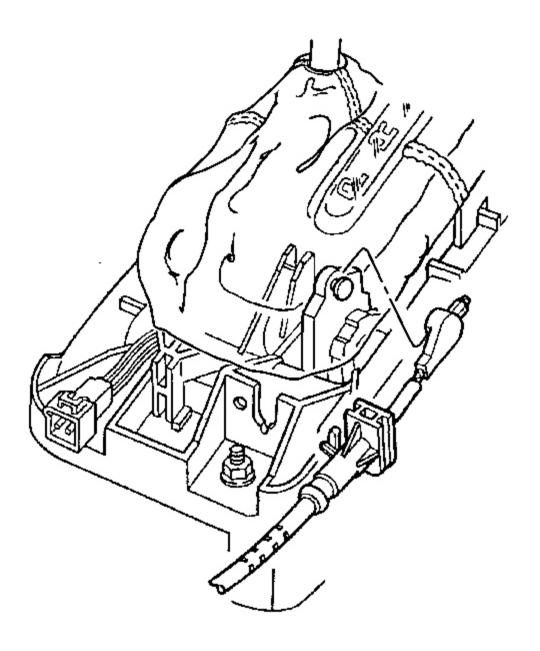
Park/Lock Cable & Shift Control Pivot Arm Stud Courtesy of GENERAL MOTORS CORP.
